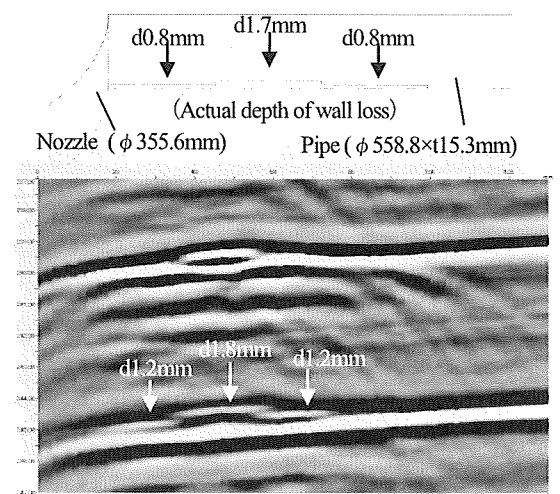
B-scan from stair-step wall loss in the axial direction of the test specimen B, and figures show actual depth of wall loss (top) and measured depth of wall loss from the B-scan data
